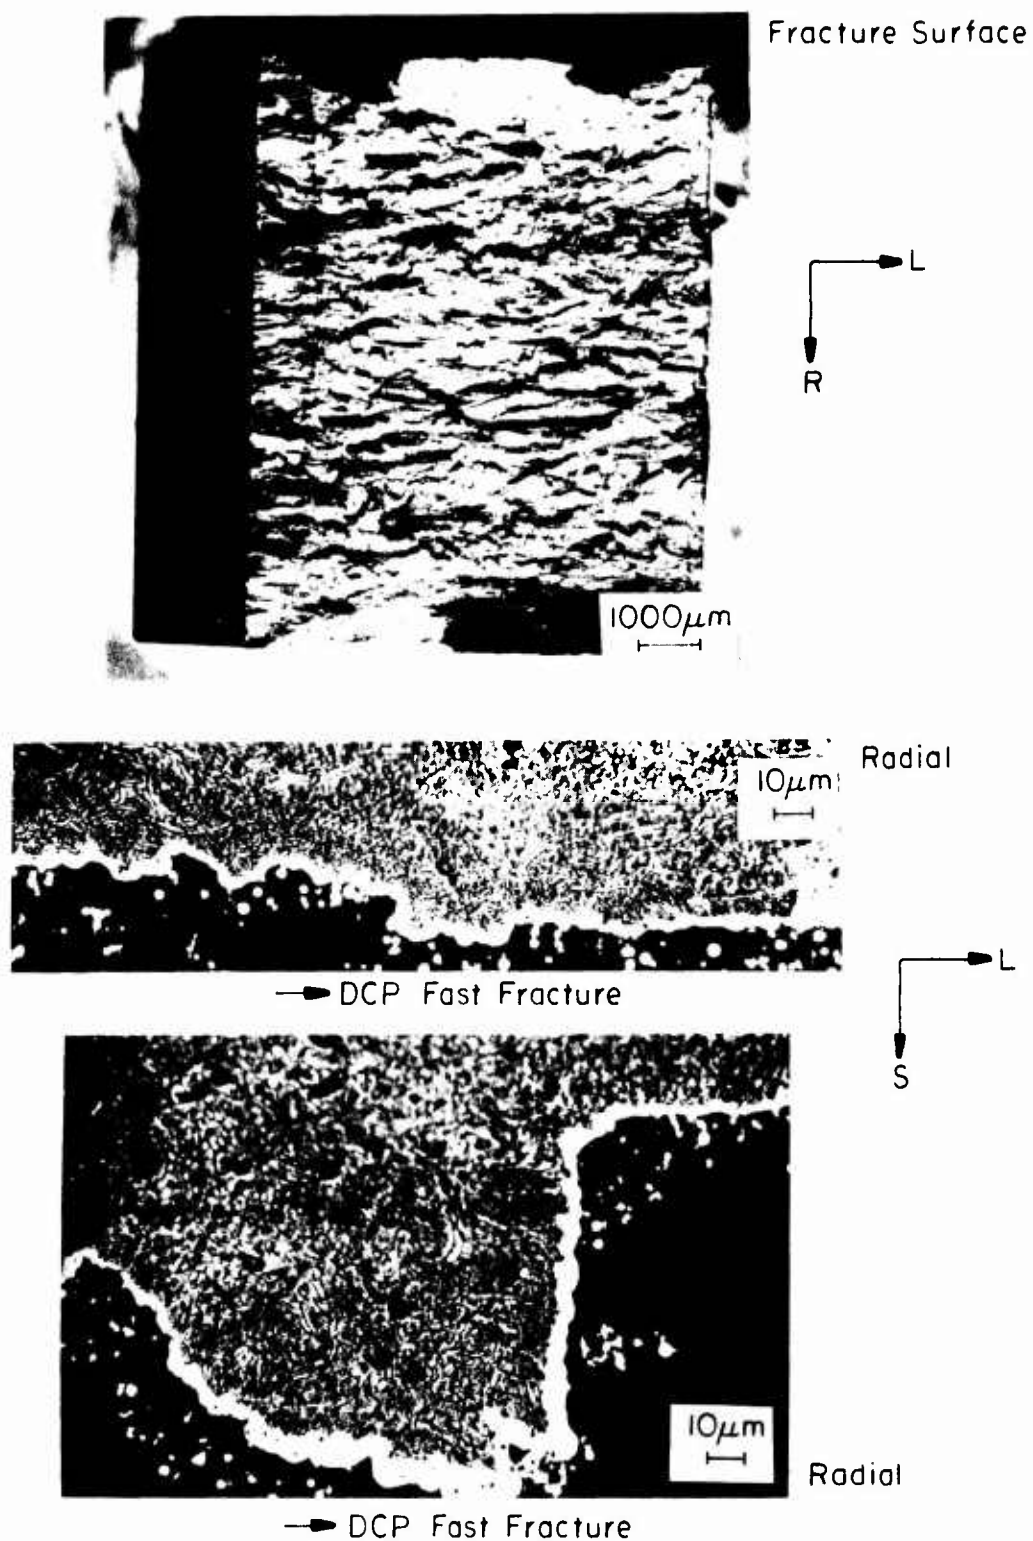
Alloy 253, sample 3SLC2. Fracture surface X8, crack path (top) X500 close to transition, (bottom) X500 distant from transition.
